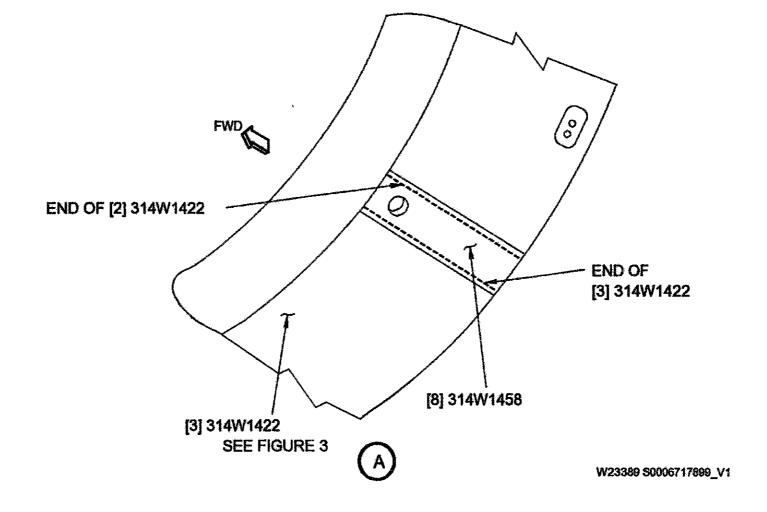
Inlet Cowl Skin Identification - GE90-100 Series Engine - Sheet 1
